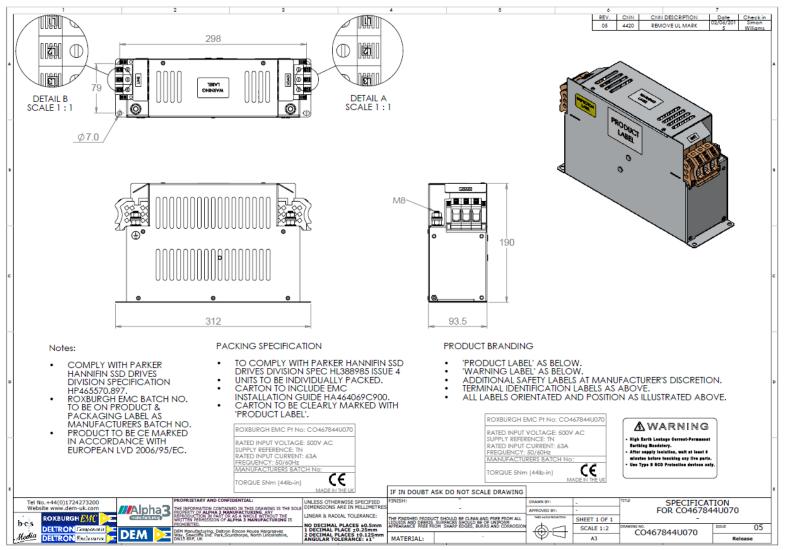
Filter Mounting Details, Part No. CO467844U070 for Frame 1:45 Amp
